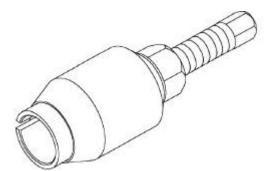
Front Crankshaft Seal Remover 8511 Courtesy of CHRYSLER LLC
